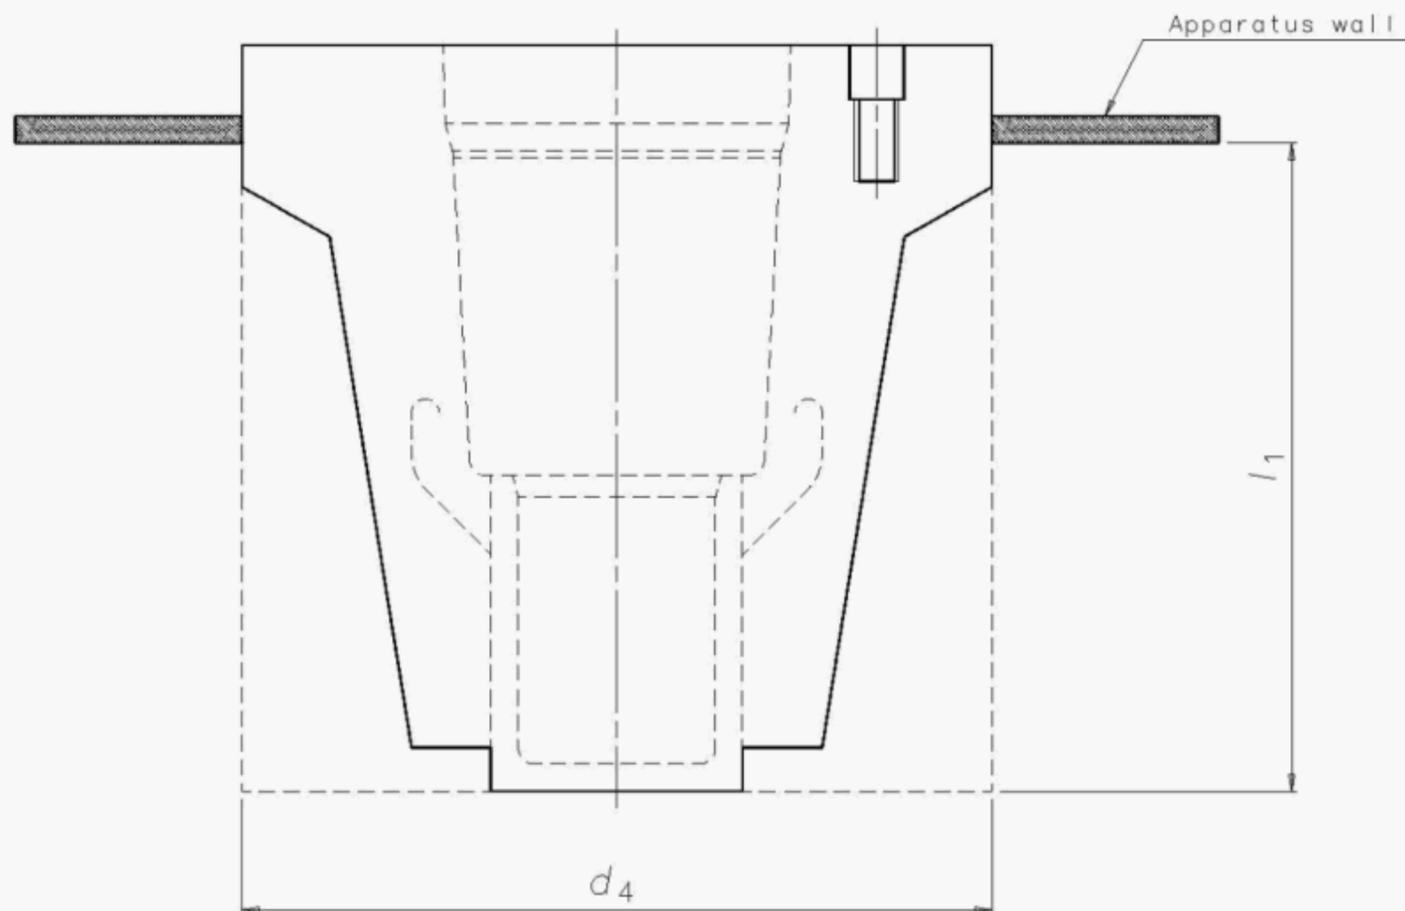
Outer dimensions of inside cone plug-in type bushings
